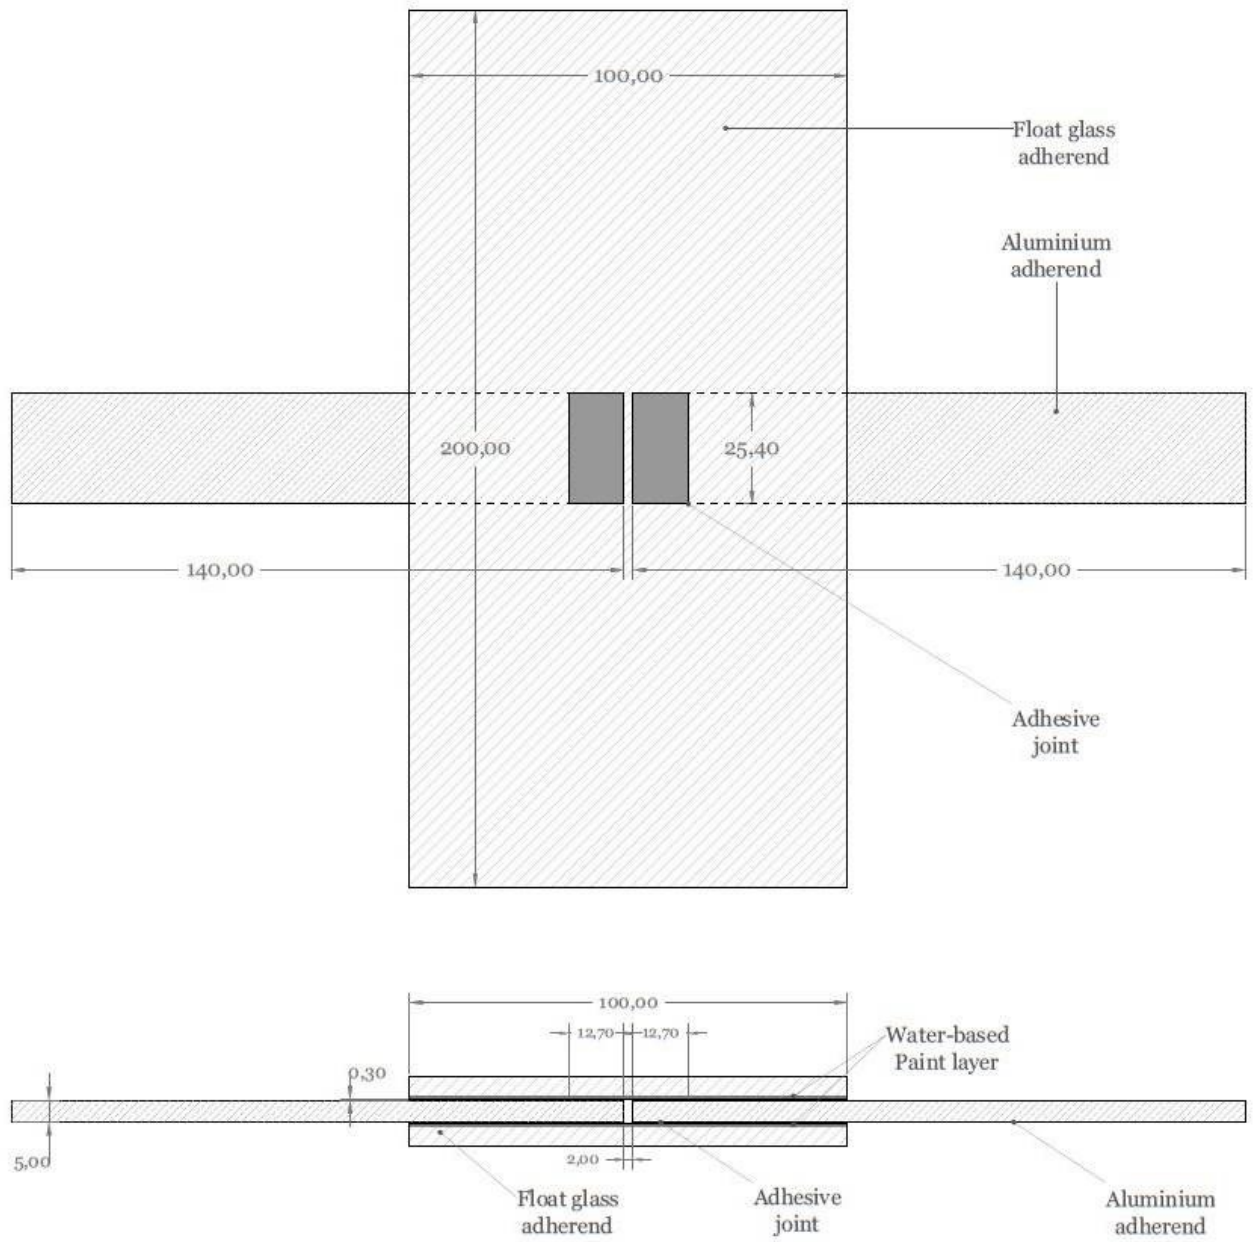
Double lap specimens' geometry (mm), section and plan view.
